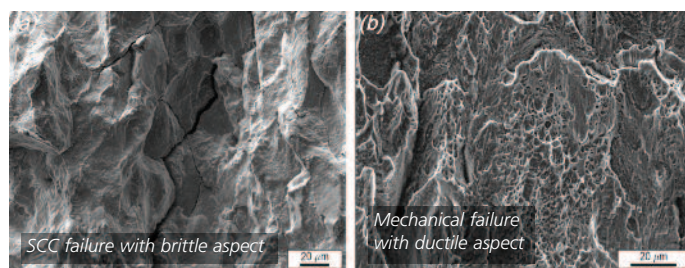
Fracture surface of (a) WF675 and (b) 78456/337
